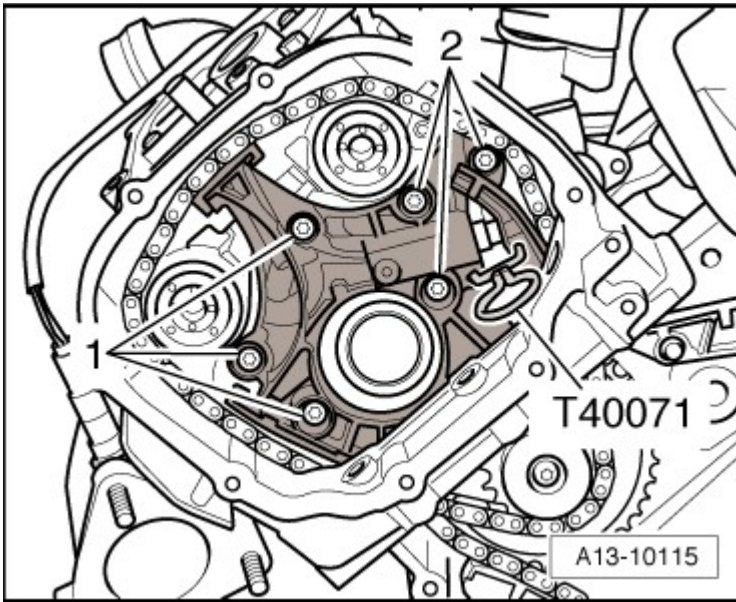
Identifying Bolts For Left Chain Tensioner And Left Camshaft Timing Chain
